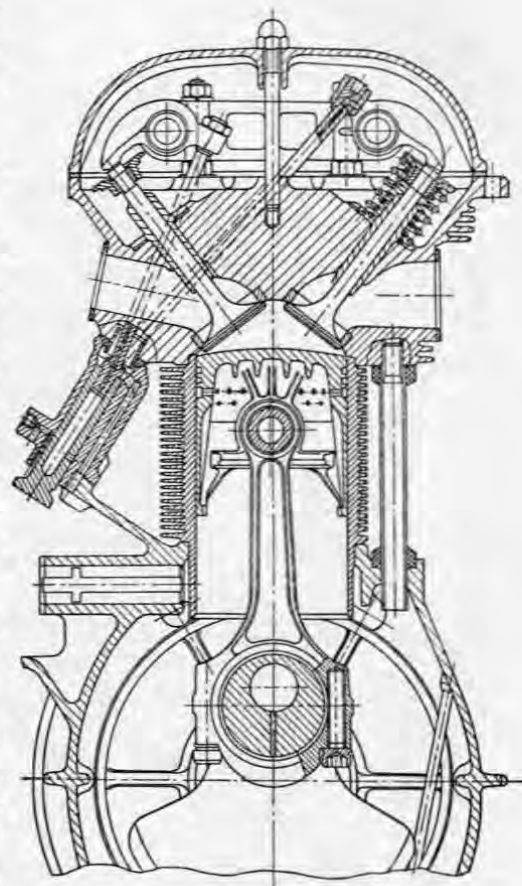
Hemispherical combustion chamber of the Tatra 910 petrol engine.
